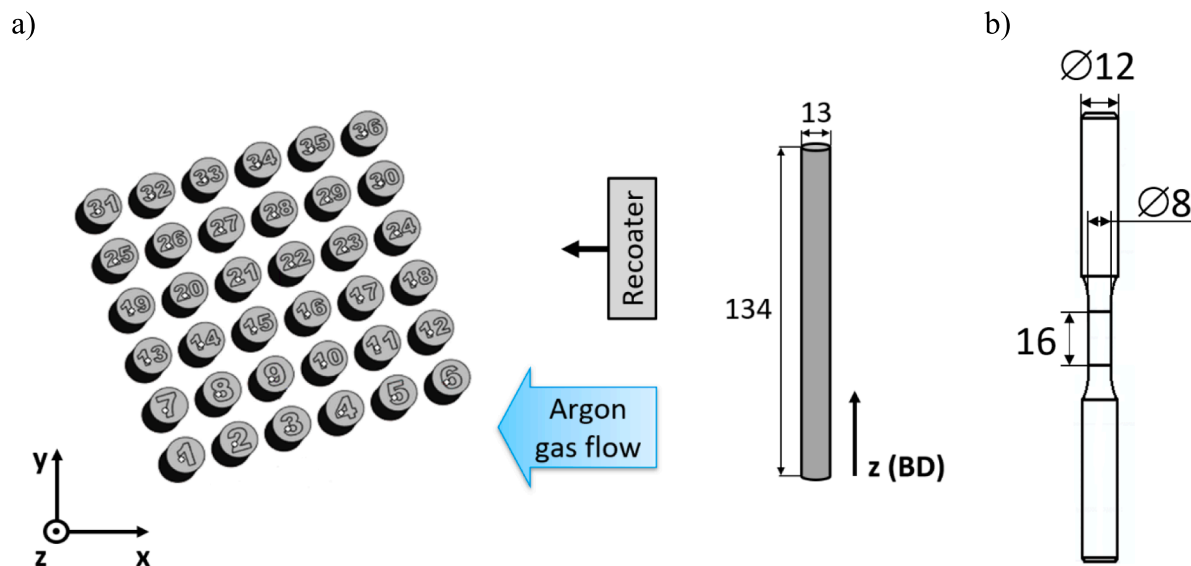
Fabrication of the fatigue specimens: a) Schematic of the PBF-LB/M sample arrangement within the build chamber; b) Final shape of the fatigue specimens after machining.
